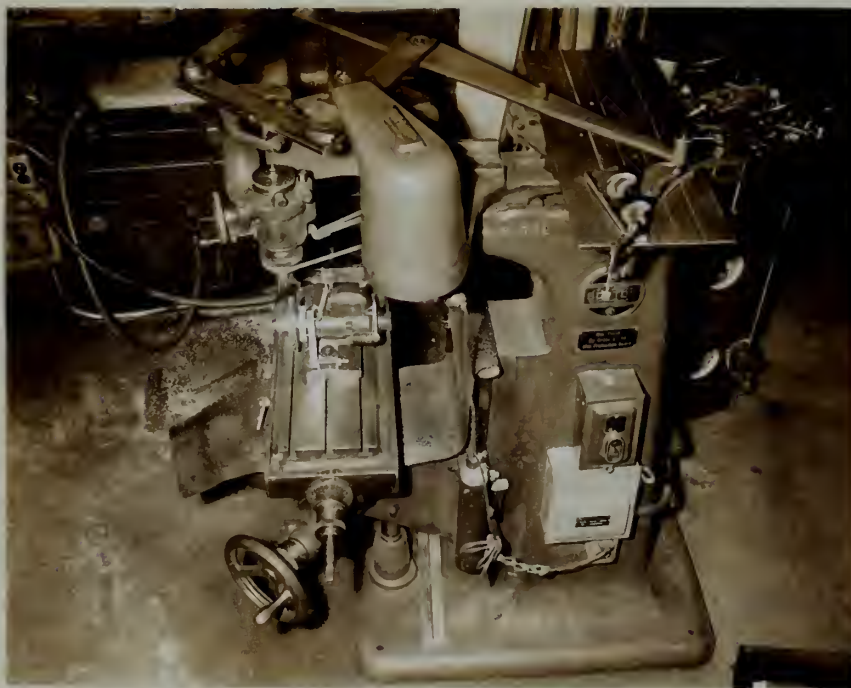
Pantograph Engraving Machine Set Up to Cut the Supersonic Nozzle
